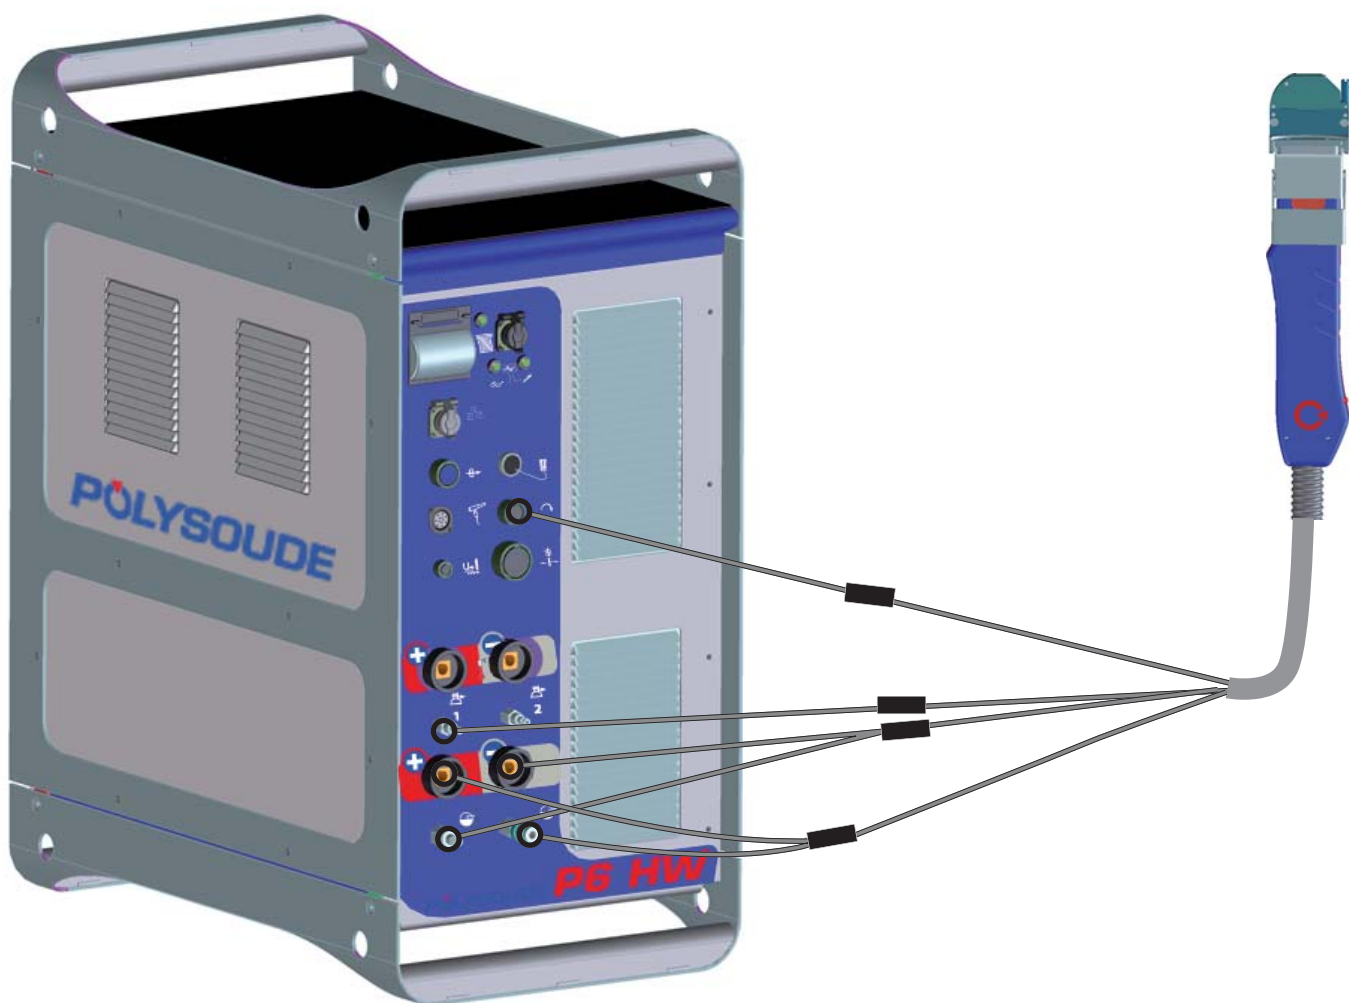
Connection of a closed chamber welding head equipped with tacheometry
